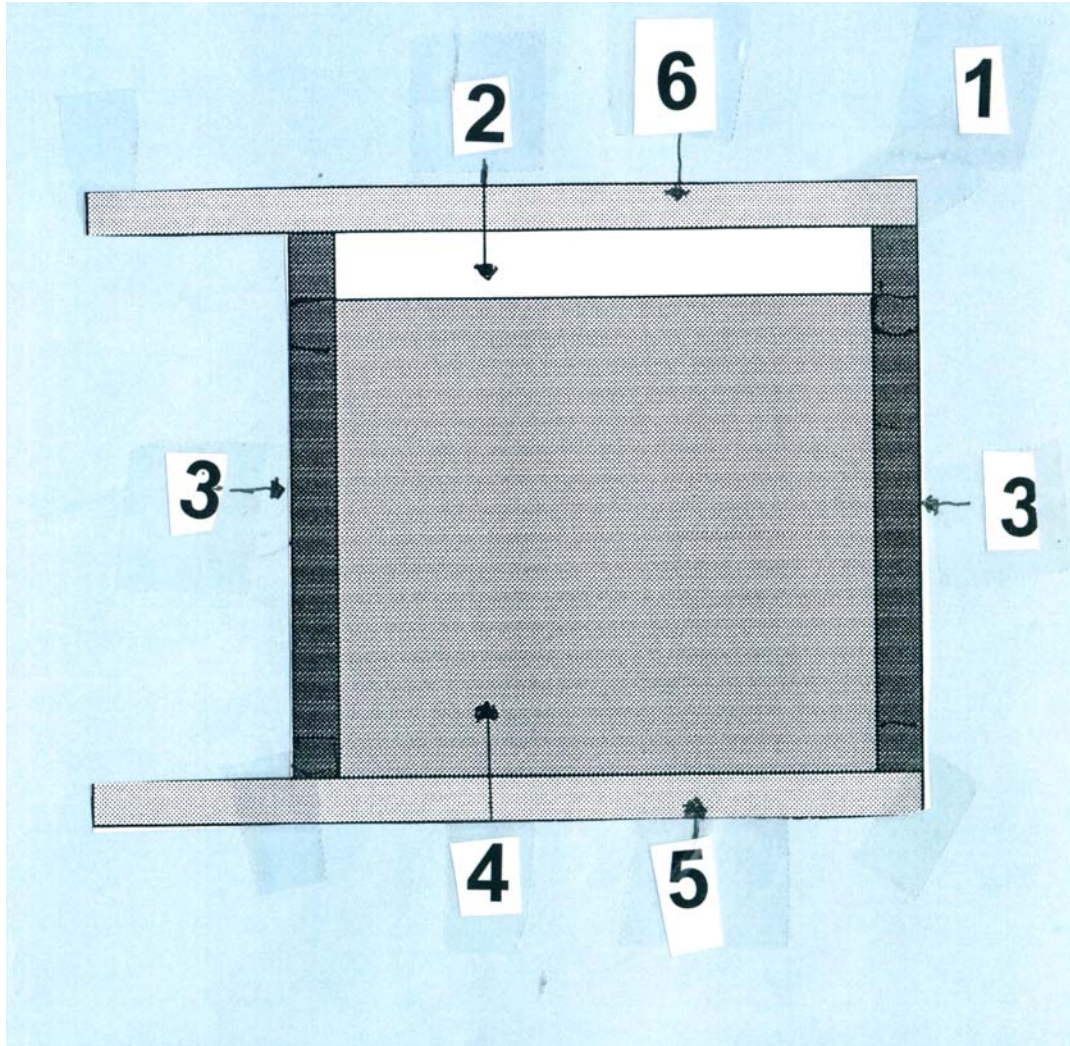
A top view of the first setup for fabricating a composite part with a low volume percentage of reinforcement fibers. Legend: 1-rigid base plate, 2-cut fabrics, 3-rigid spacers, 4-release fabric and transfer medium, 5-fill line, and 6-vacuum line.
